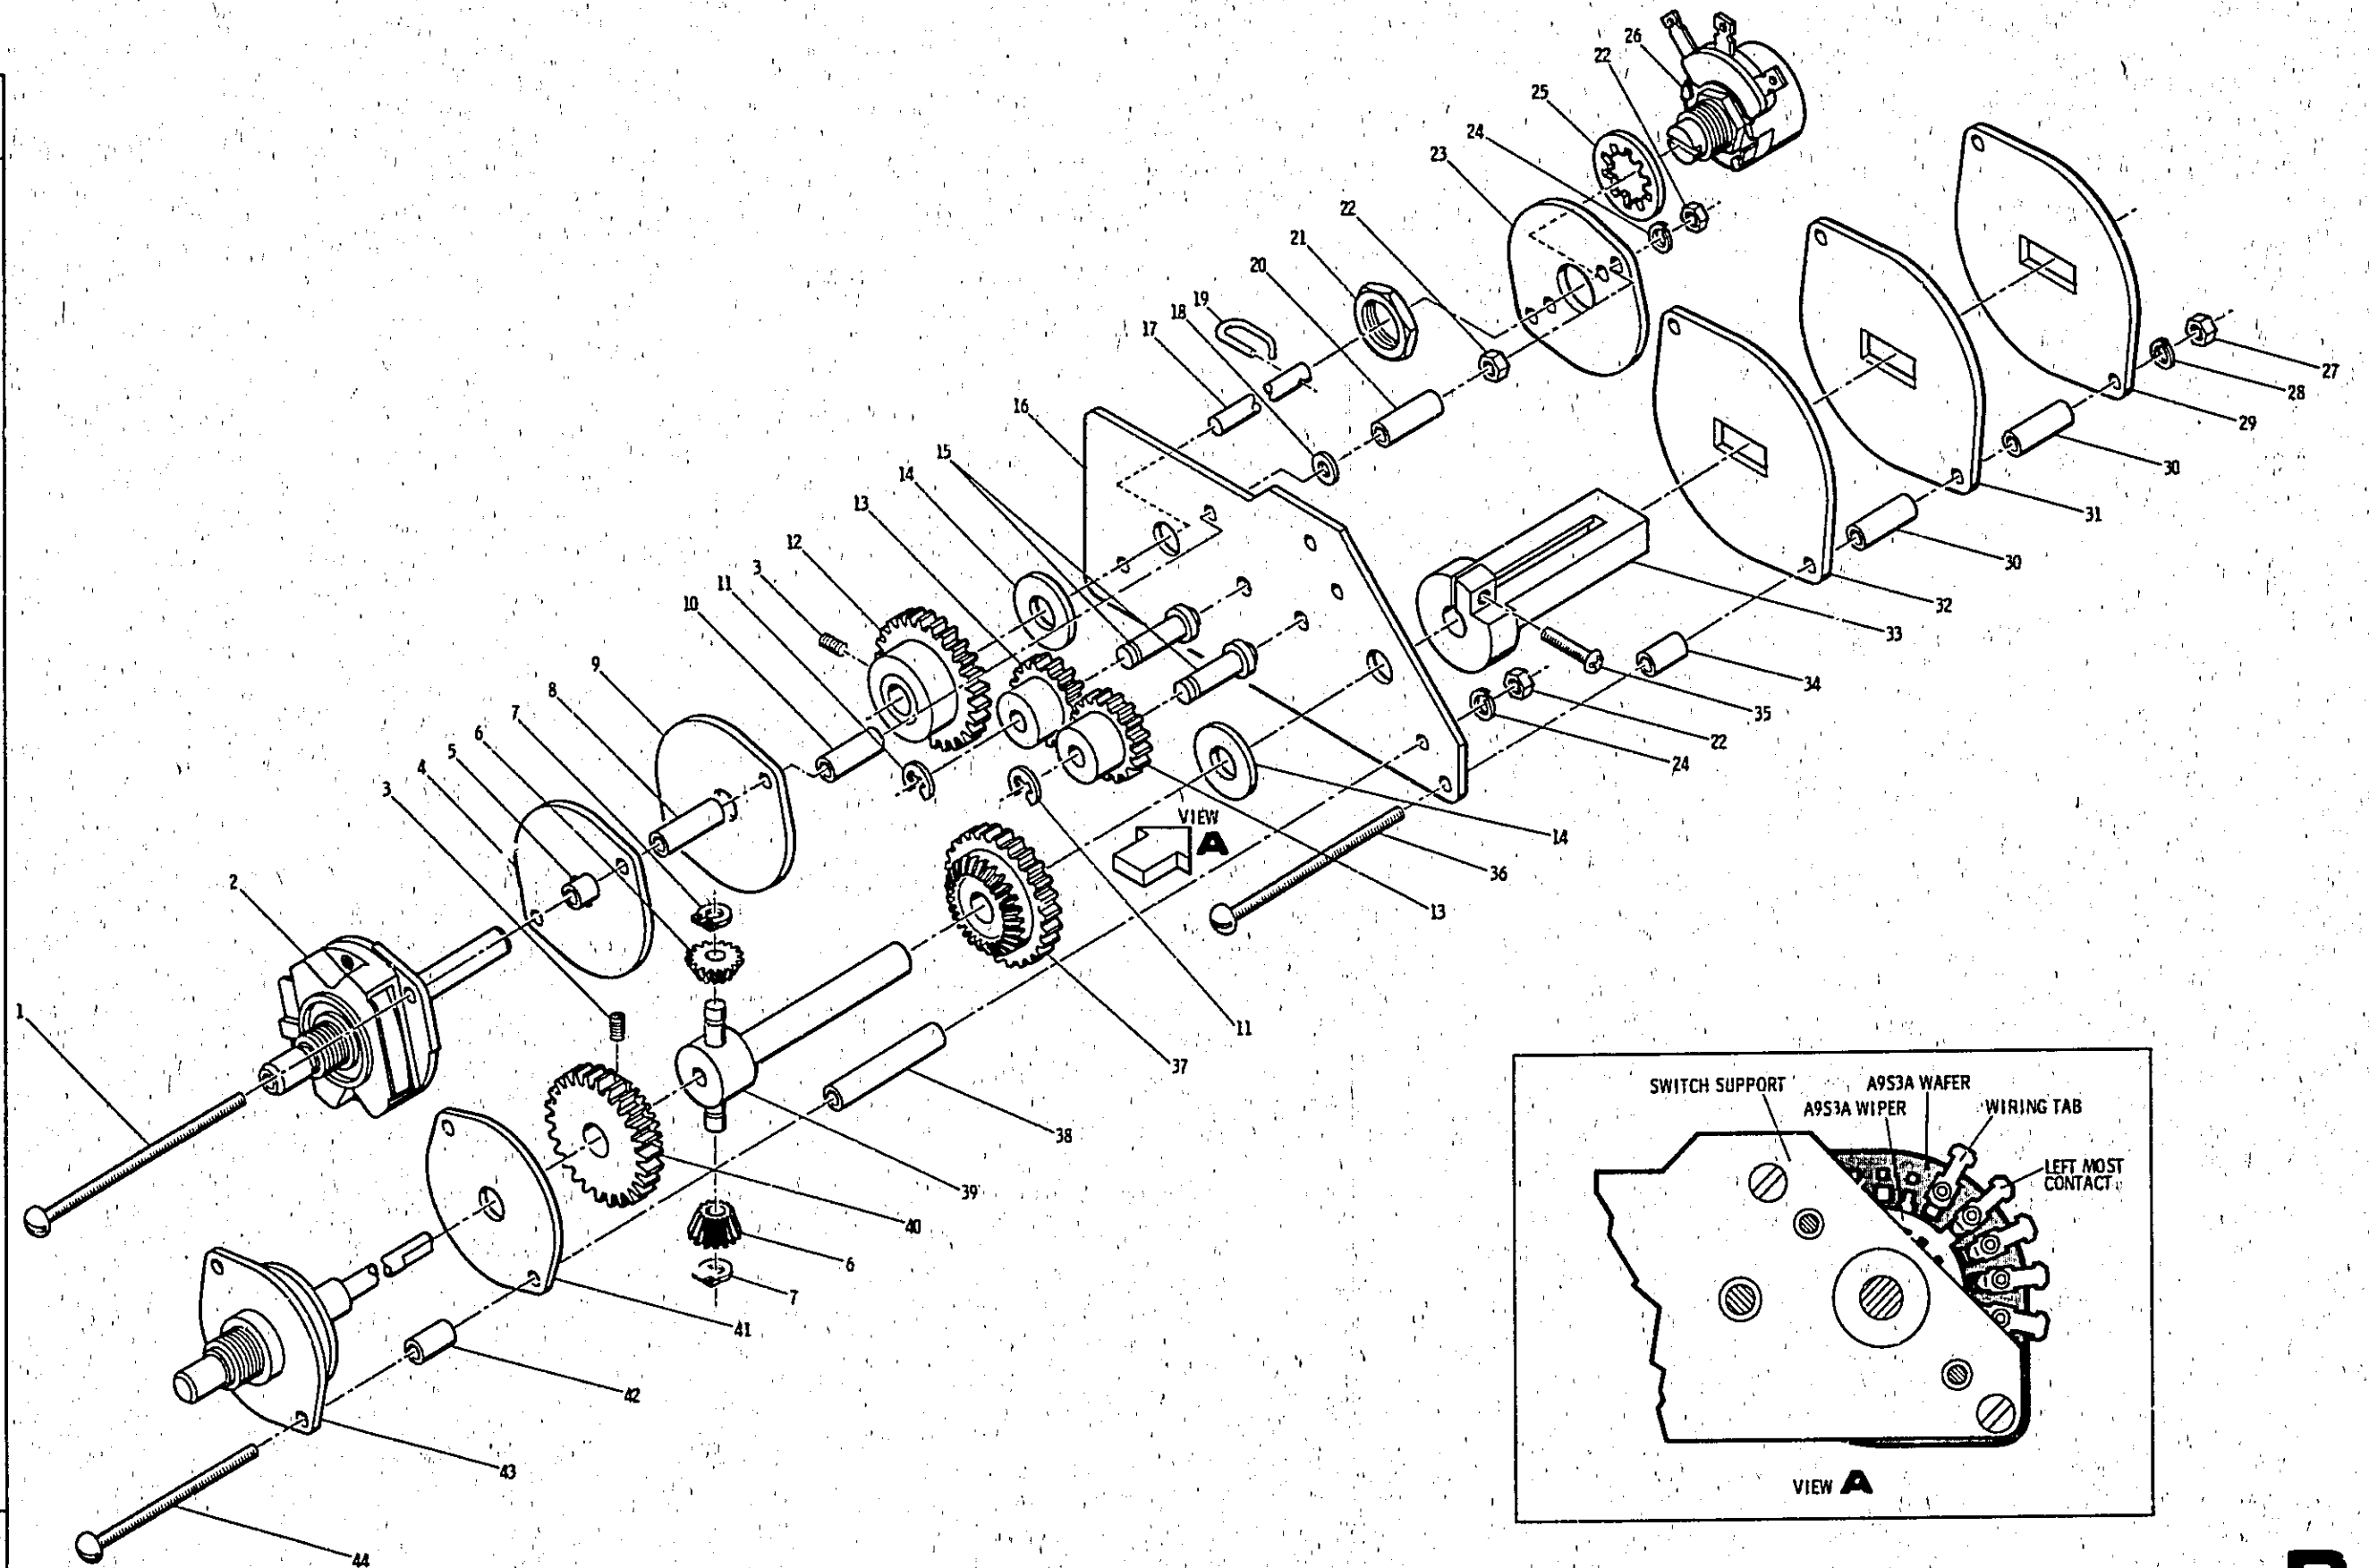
A9 Peak Deviation and Range Switch Assembly Illustrated Parts Breakdown
